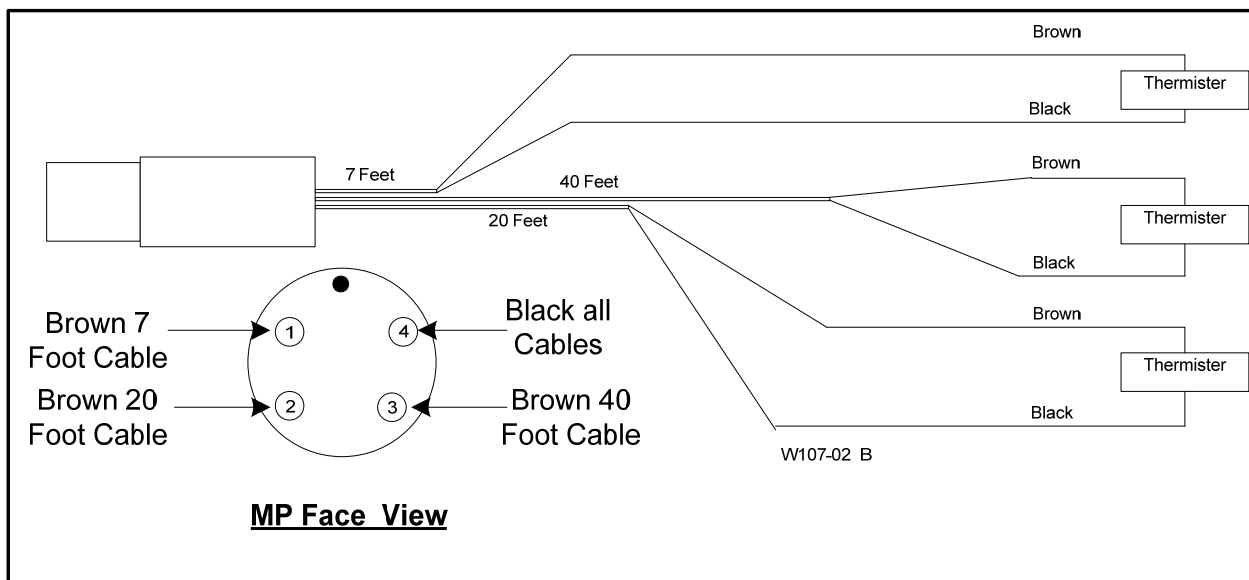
Water Proof Thermistor Cable (W-107-02)
